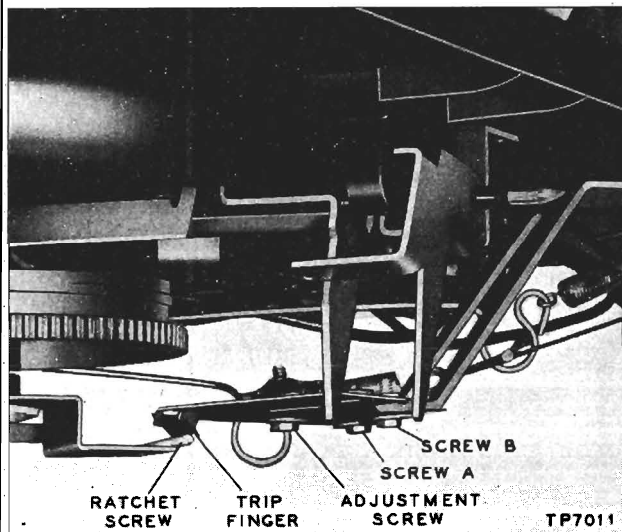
Trip-Finger and Trip-Receiver Adjustments
